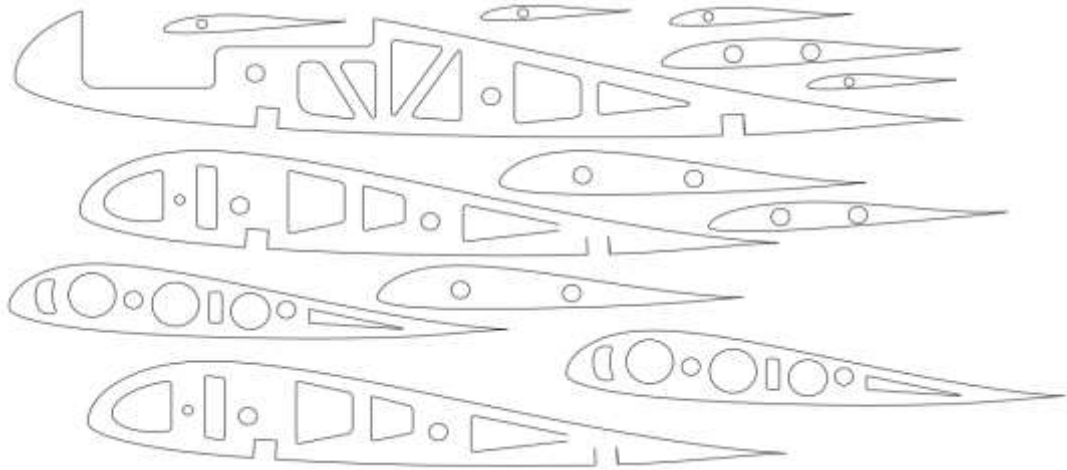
17: 2D- Drawing for CNC LASER cutter
